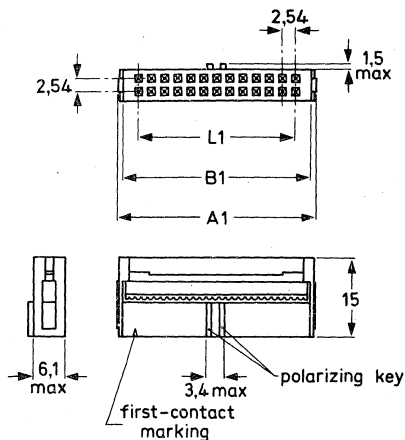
Cable connector with polarizing key; for dimensions A1, B1 and L1, see Table 1.
